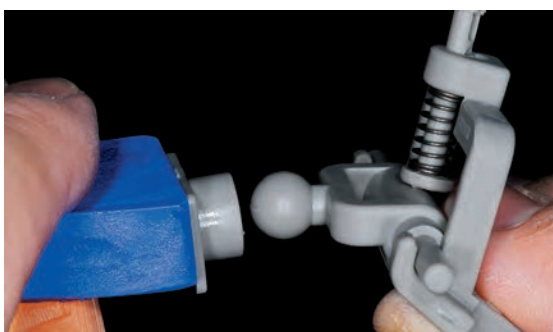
Assemble ball joint and articular base together. Snap ball joint into ball receiver.
